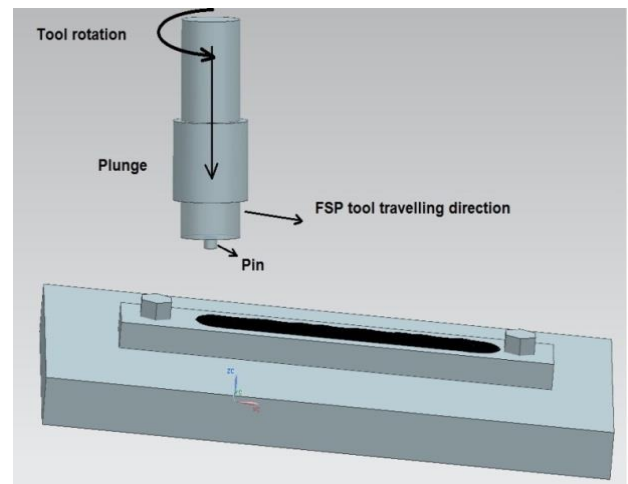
Schematic illustration of the FSP tools (Dimensions in millimeters).
